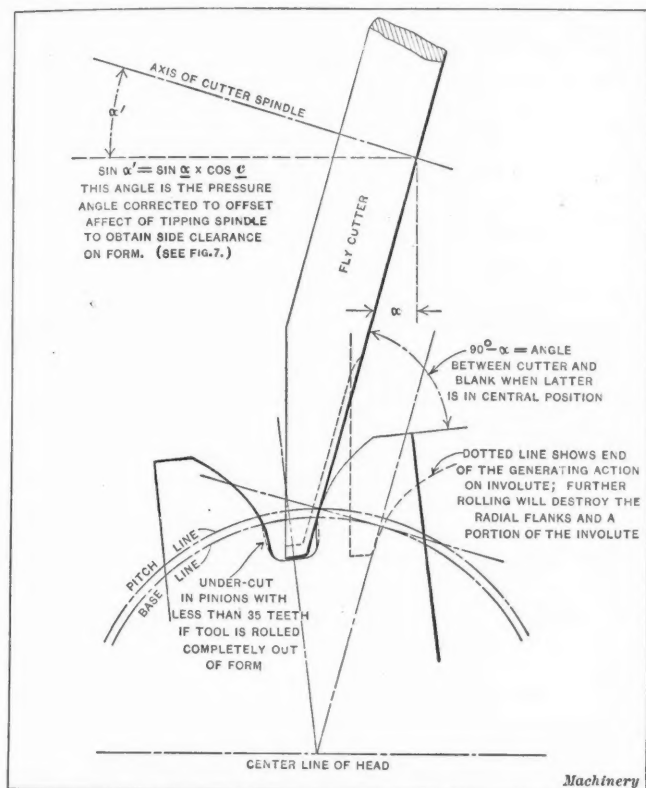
Second Method of setting Milling Machine to generate Forming Tool for Gear Cutters with a Straight Fly Cutter
